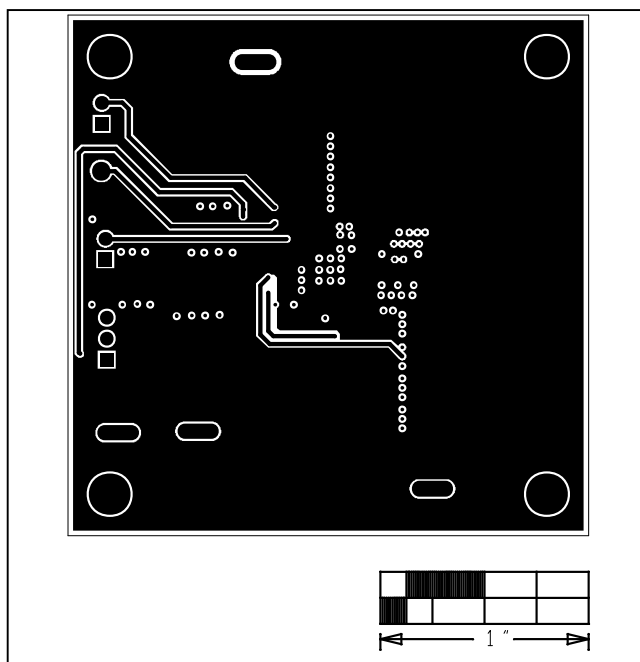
MAXM17543 EV Kit PCB Layout—PGND Layer 3
